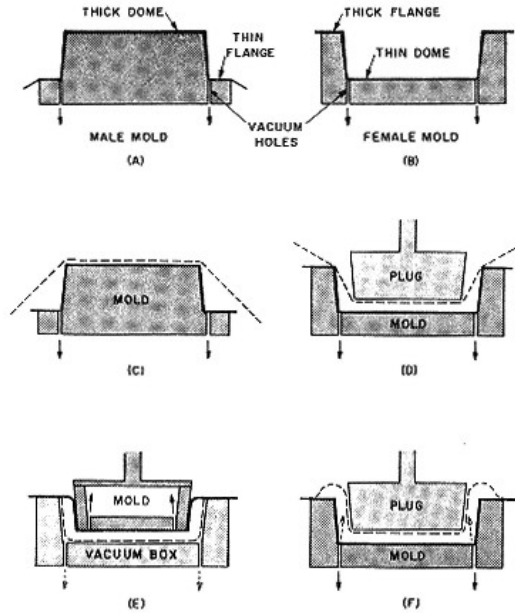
Thermoforming techniques include: (A) male mold; (B) female mold; (C) male mold with vacuum; (D) female mold with plug assist; (E) snap-back forming (pulls heated plastic into vacuum box then forces it back up against a male mold); (F) billow forming (compressed air stretches the sheet upward, after which a plug carries it down into the mold as a vacuum pulls it into place).
